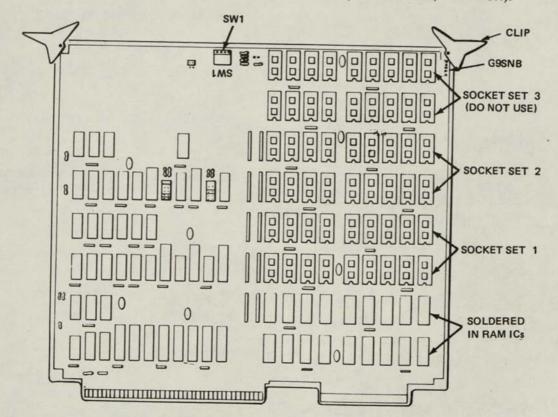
The APC-H31 Memory Expansion Unit PCB (G9SNB)
